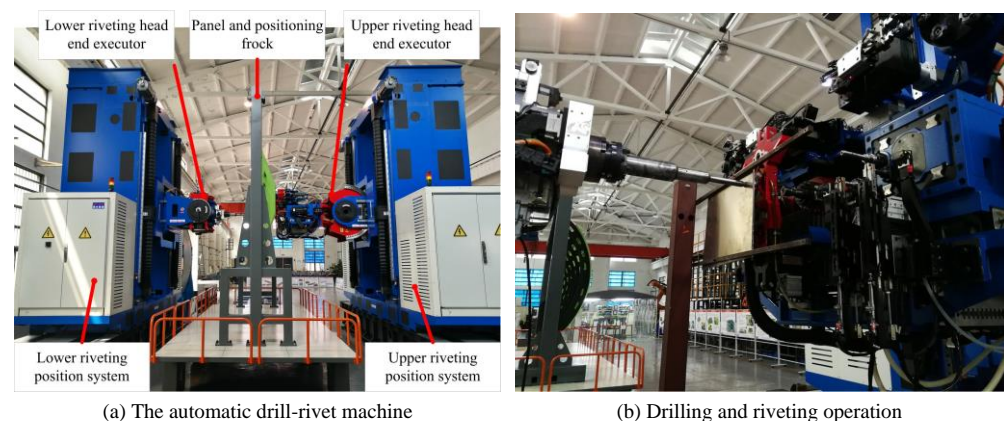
The automatic drilling and riveting machine and its experimental process. (a) The automatic drill-rivet machine; (b) Drilling and riveting operation.
